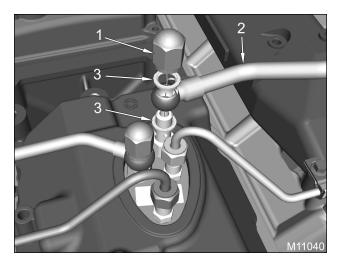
Filter to pump tube assembly, M12 cap nut, and M12 bonded seal washers
